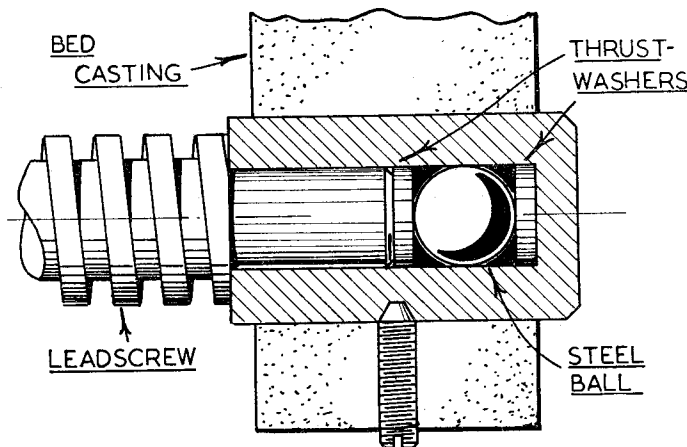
Diagram of the leadscrew thrust-bearing fitted to an old Britannia lathe
